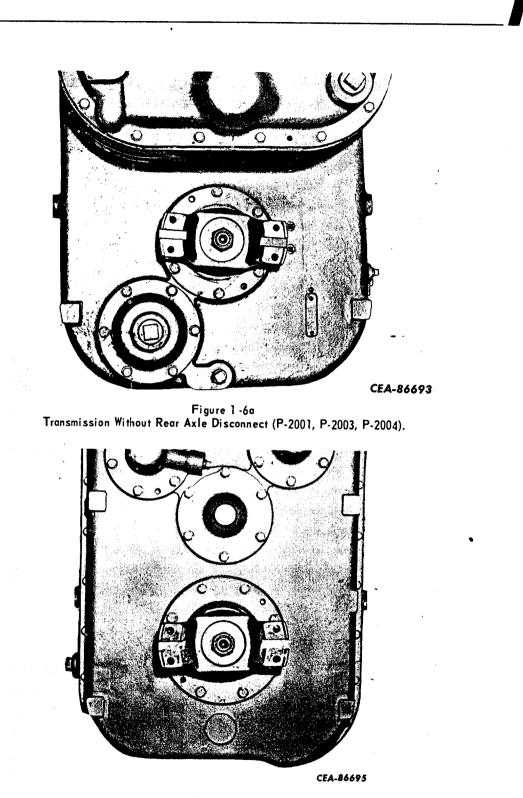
Transmission Without Transmission Mounted Parking Brake (P-2001, P-2003, P-2004).
